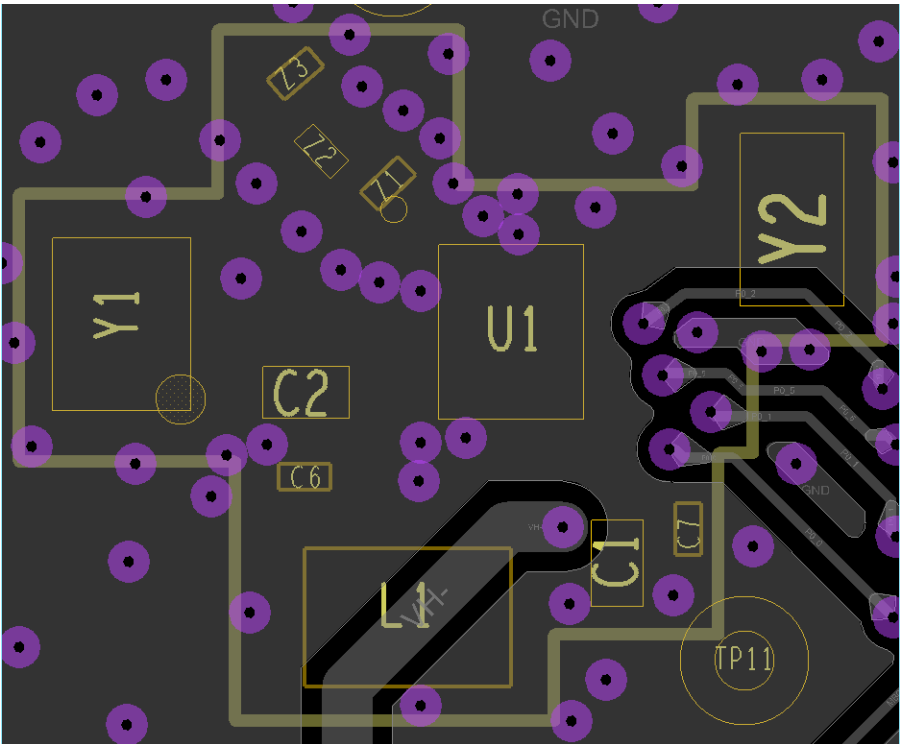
WLCSP17 PCB Placement and Routing - INT2 Layer
